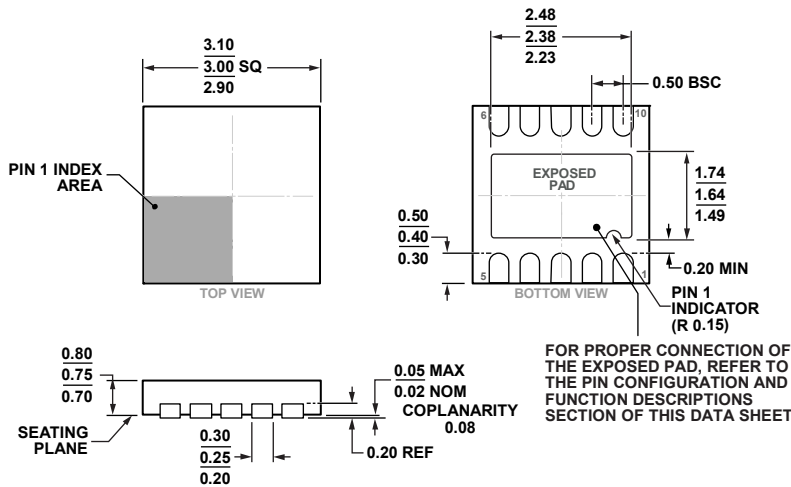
10-Lead Lead Frame Chip Scale Package [LFCSP_WD]
